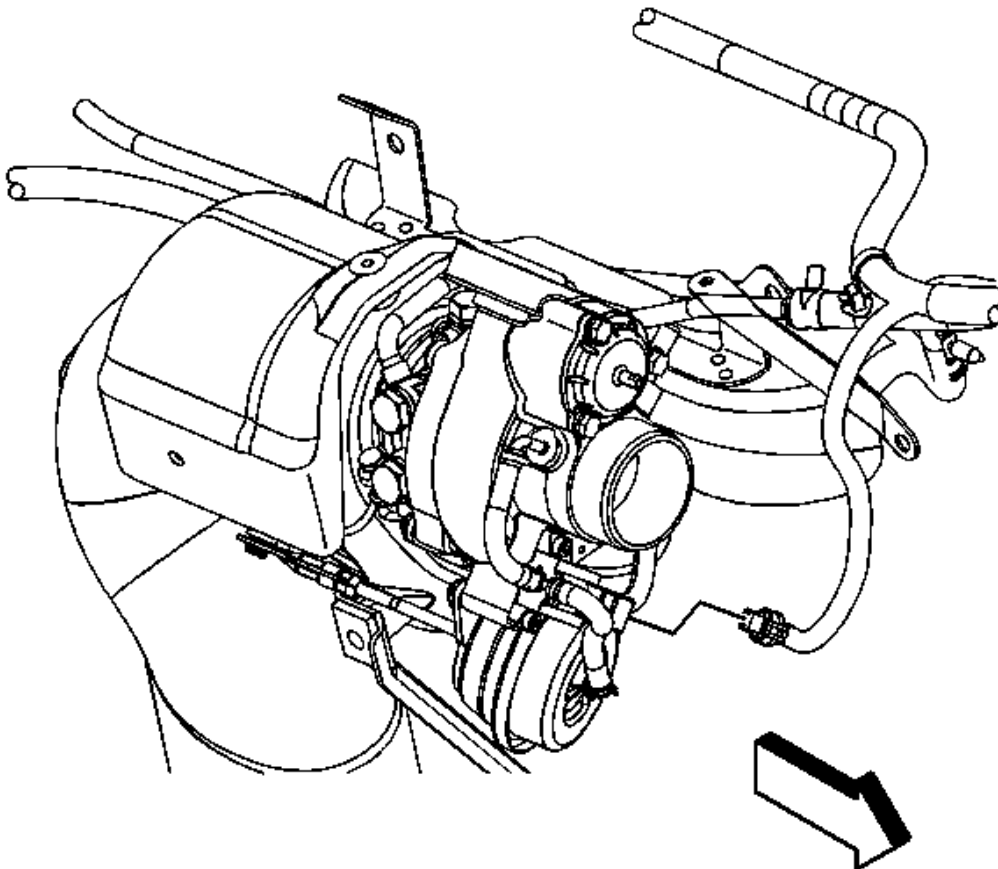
Locating turbocharger wastegate solenoid valve Harness & Connector
